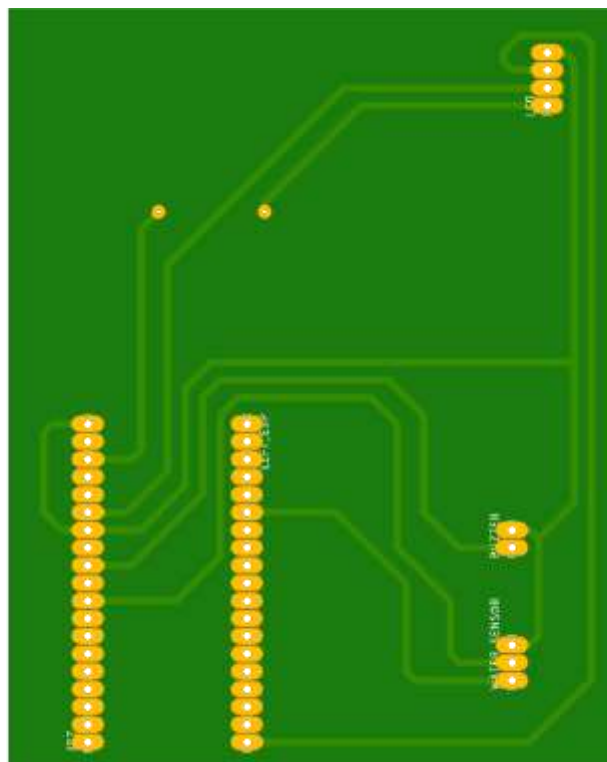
Sensor node 1 and sensor node 2 PCB layout
